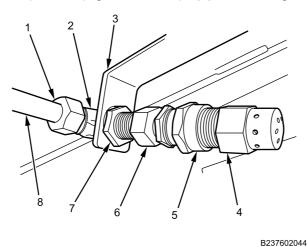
FSS Fuel Tank Dispersion Unit and Pipe, (Rear Nozzle Shown, Front Nozzle Similar).
